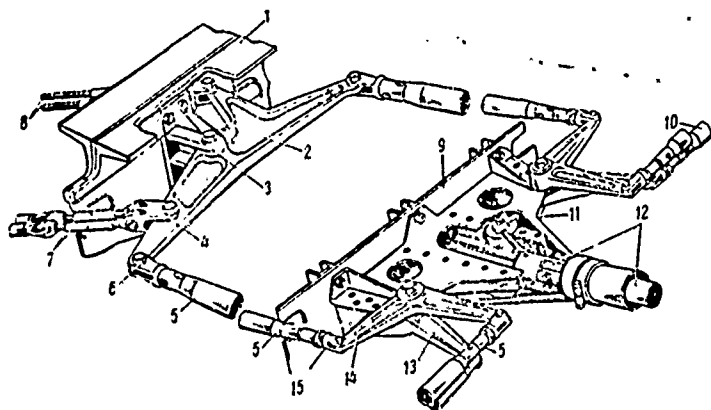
Actuating arms and control rods of ailerons in the cargo compartment of the fuselage: 1 - frame No. 6; 2 - double-arm actuator; 3 - mounting bracket of actuator; 4 - link; 5 - aileron control rod; 6 - tip of rod; 7 - clamps; 8 - cables; 9 - frame No. 8; 10 - flap control rods; 11 - box of UZ-1A mechanism; 12 - rod of UZ-1A electrical mechanism; 13 - L-shaped actuating arm of flap control; 14 - L-shaped actuating arm of aileron control; 15 - tip.
